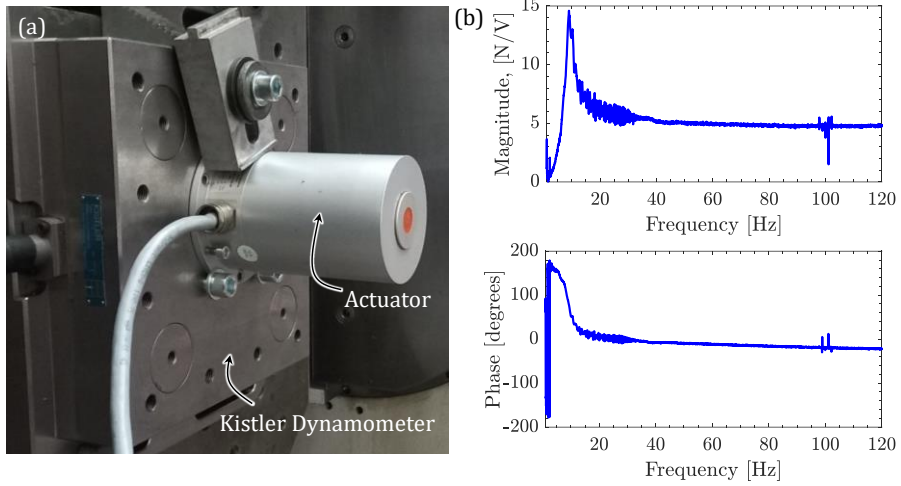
(a) A robotic milling setup with actuator mount, (b) Measured direct and cross FRFs of robot milling system in Y direction.
